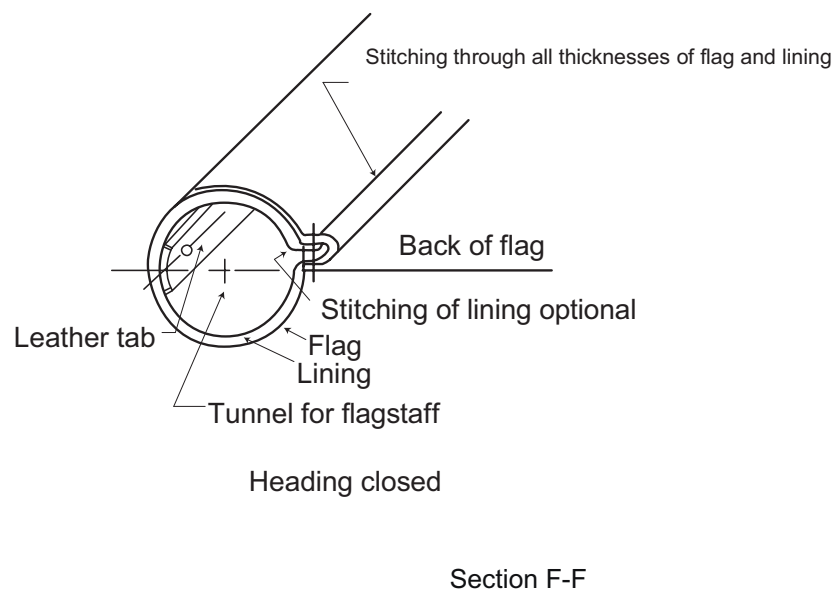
Construction details for flag type — Subtype 3A flag
